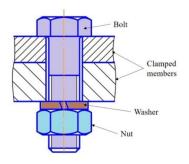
Geometric Layout of the used Bolted Joint [12]
